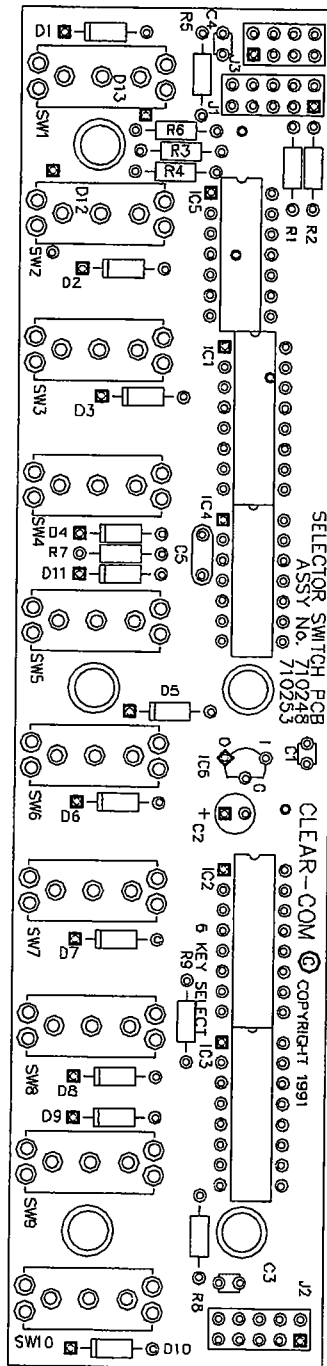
Assembly Drawing—ICS-102/ICS-102T Selector Switch PCB Rev. D
